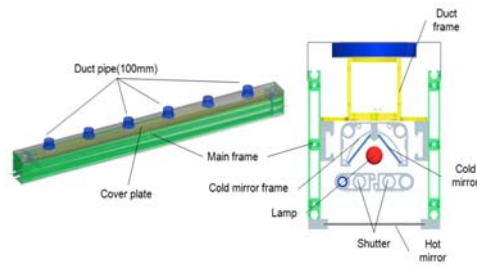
Three dimensional drawing and schematic view of UV (ultraviolet) curing system
